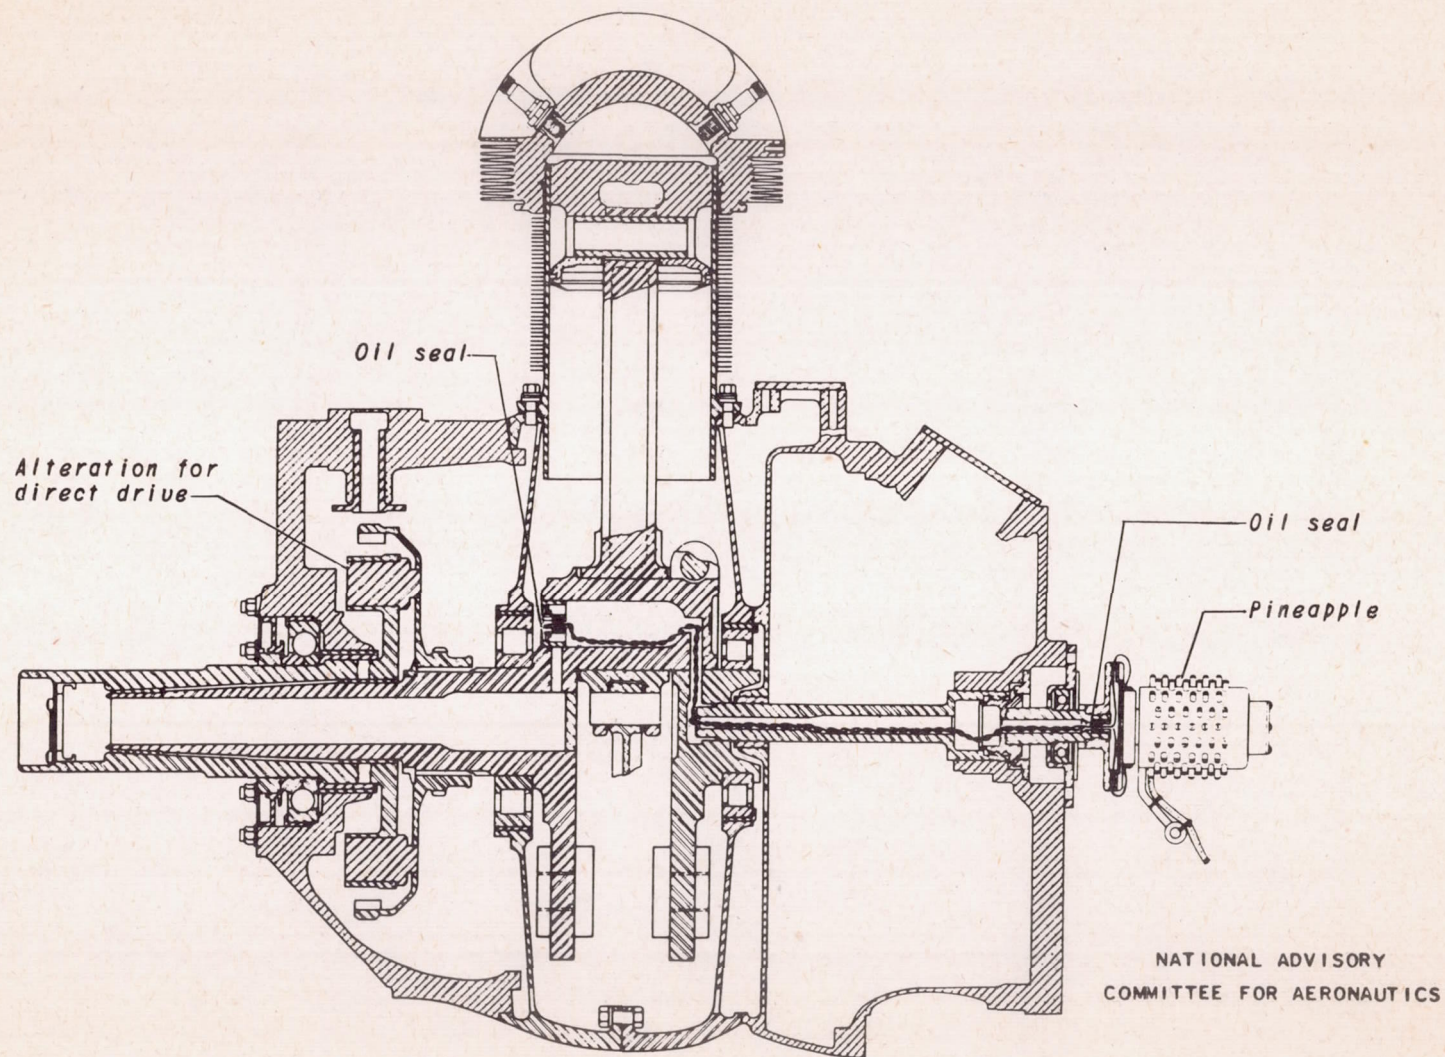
Simplified cross section of test engine showing method of bringing out wires.
